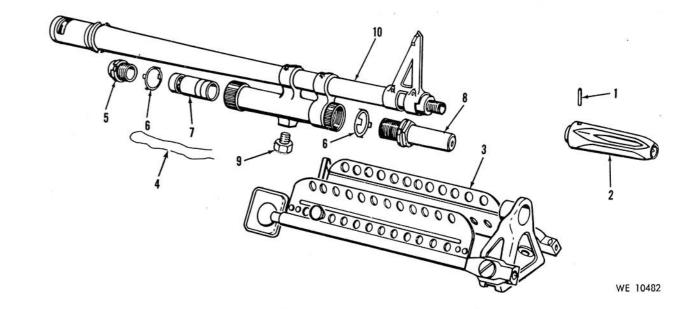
Barrel Assembly with Bipod Assembly—Partially Exploded View.
